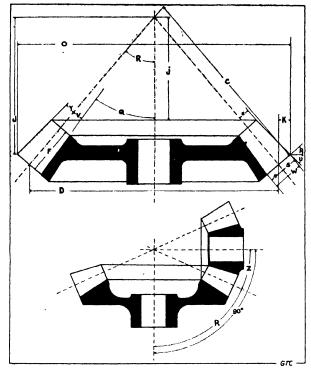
RIGHT-ANGLED BEVEL WHEELS, SHOW-ING PARTS
